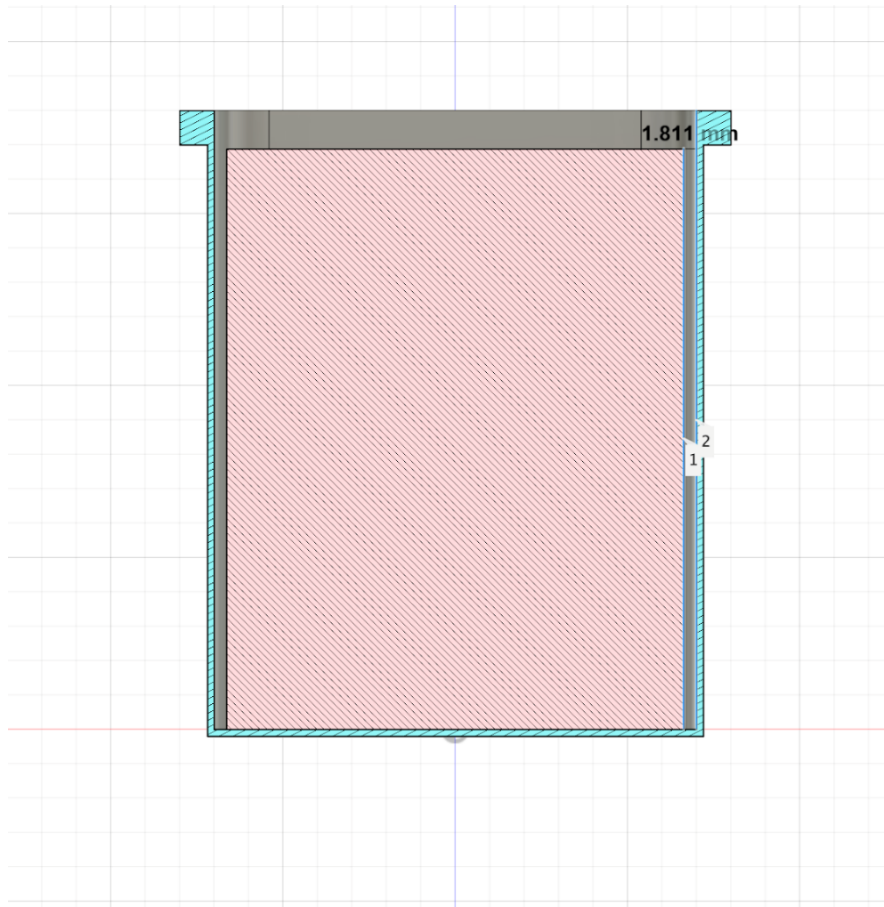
Screenshot taken of a slice through a 3D assembly made in Fusion 360. The assembly shows the aluminium housing (grey with sliced section shown in blue) and a dummy crystal (pink). The dummy represented an estimate of the combined size of all four NaI(Tl) crystals with PTFE wrapping. The distance between the side of the housing and the crystal has been measured as 1.811mm in the software and labelled.
